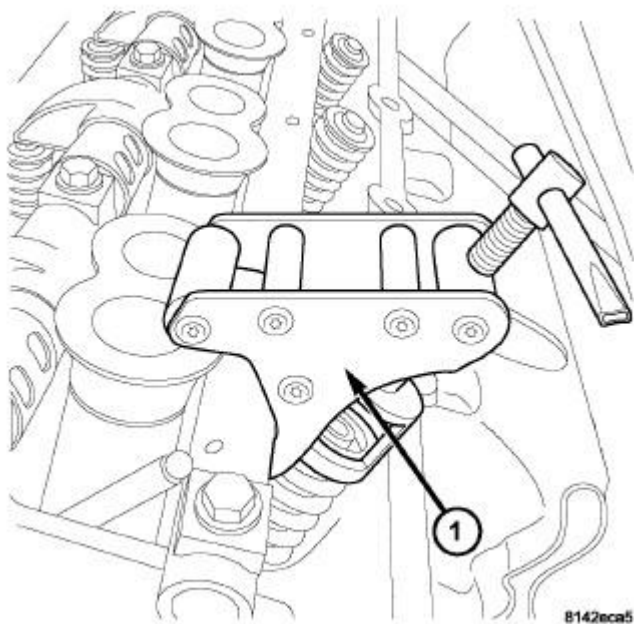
VALVE SPRING REMOVAL/INSTALLATION EXHAUST
